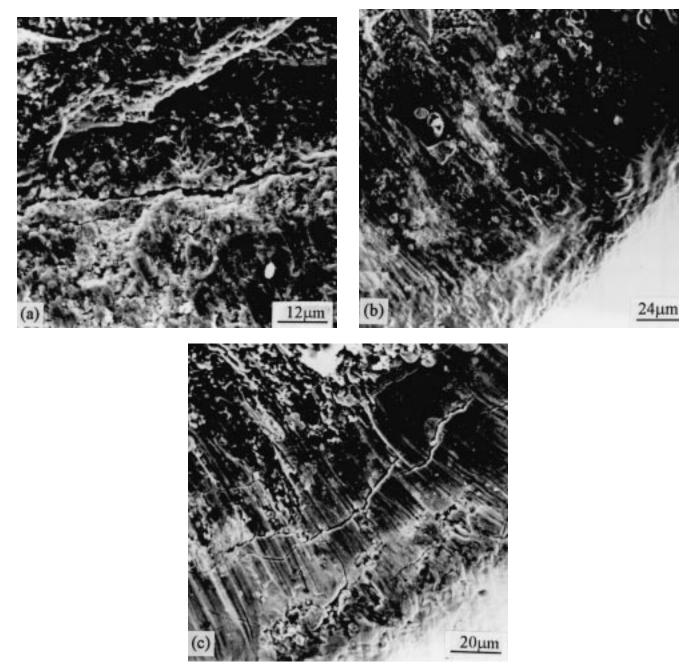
(a) to (c) Fatigue cracks in Al₂O₃/Ti(C,N) ceramic tool materials in intermittent machining
